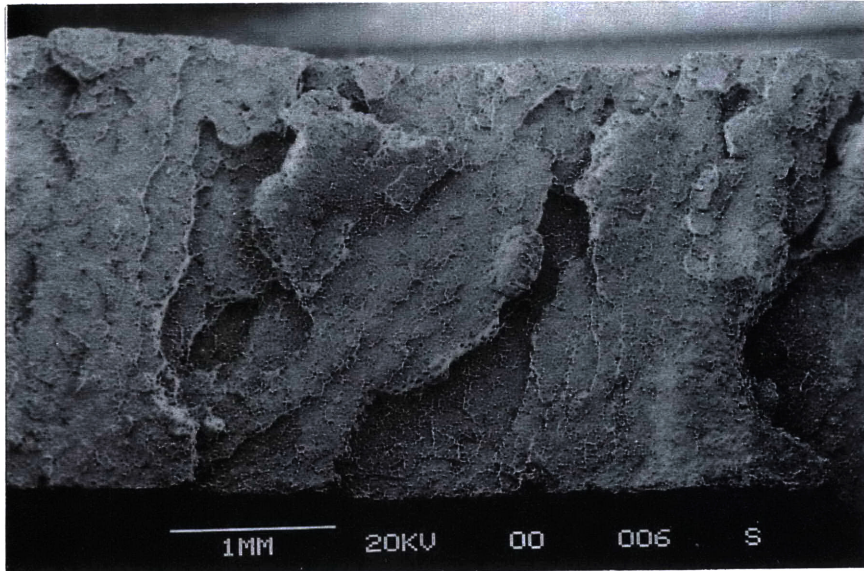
Fracture surface of Fiber FP reinforced pure aluminum tested at 77 K (Sample 0-4•Al/FP).
